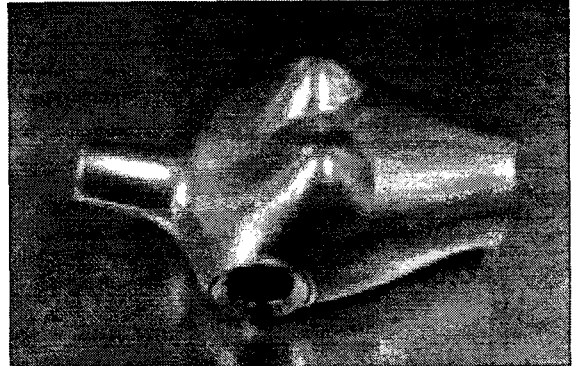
Finished products after Ultrasonic welding (Al)
